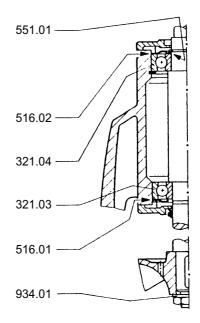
Bearing and impeller retention version for bearing bracket size 530
